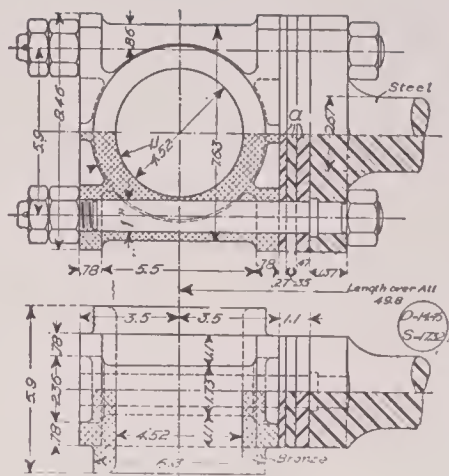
Connecting Rod for Güldner 2-cycle Engine, Fig. 35, p. 86.
